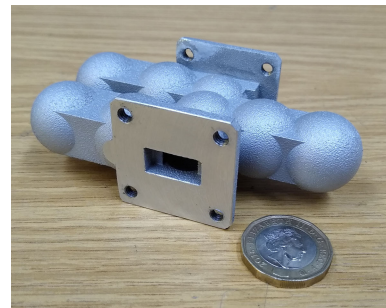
Photo of the 3rd order triple-band filter prototype fabricated using SLM (Renishaw RenAM 500Q machine).
